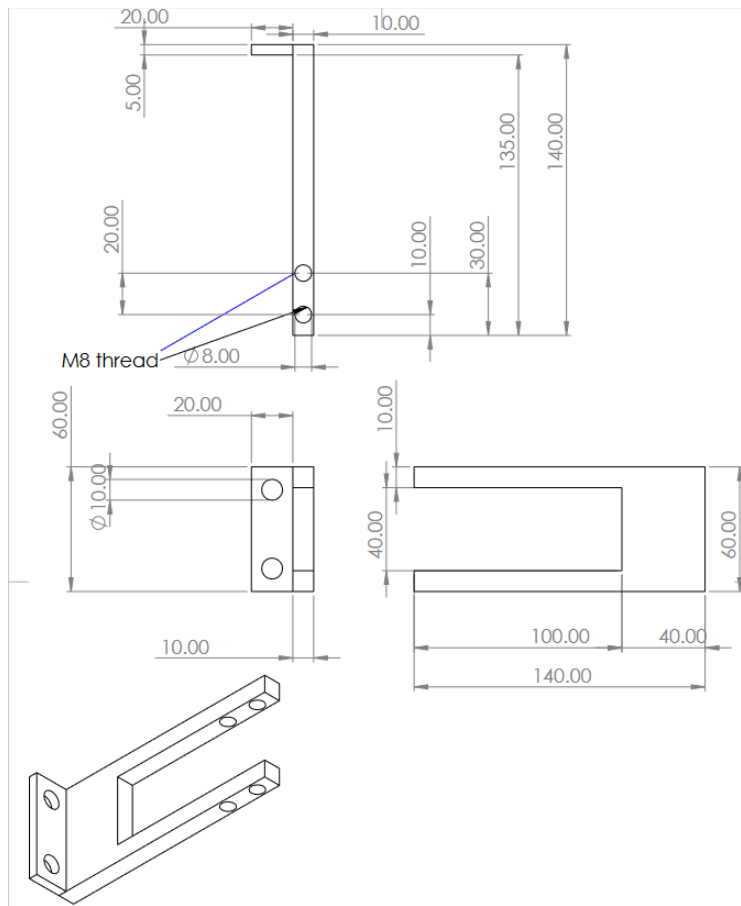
Metal prong design for fixing the crankshaft encoder in place.
